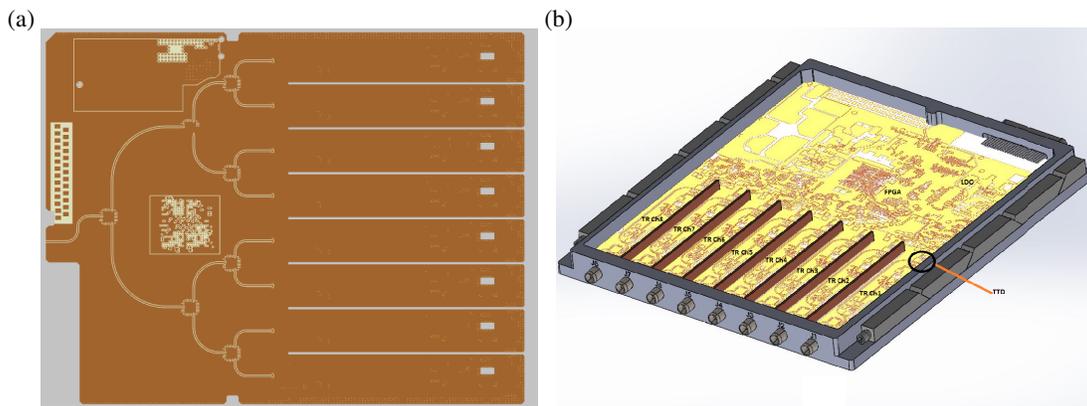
Designed OTRM PCB: (a) Bottom view and (b) Top view.
